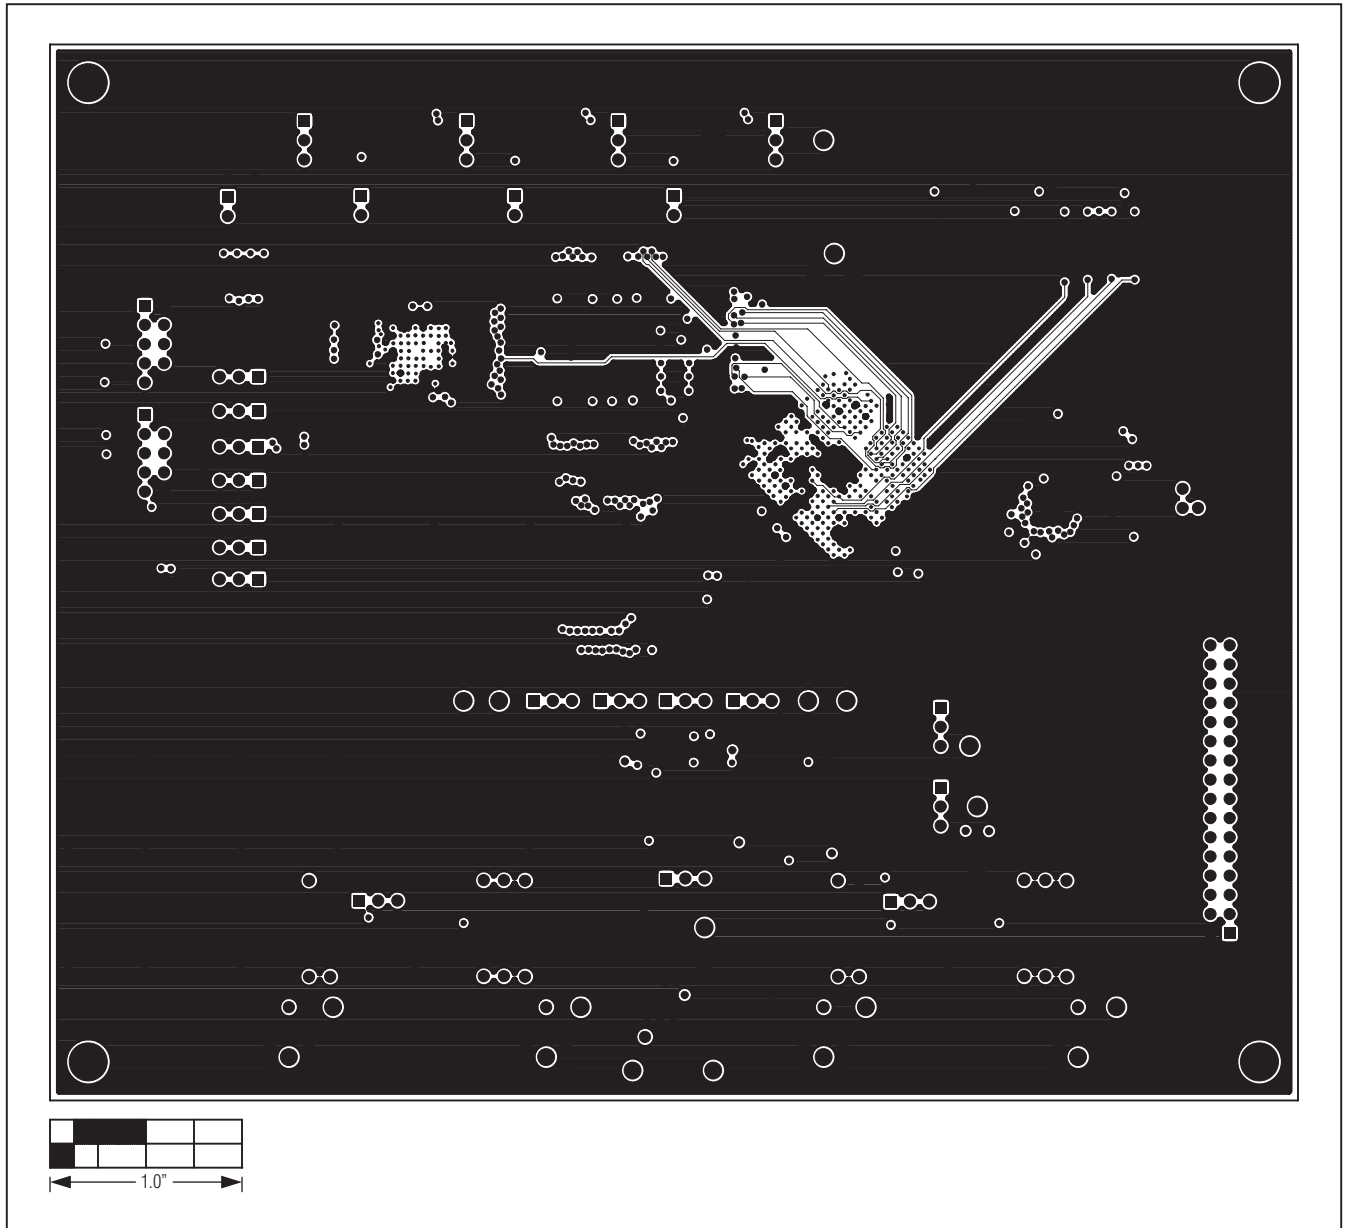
MAX11666 EV Kit PCB Layout—Layer 4
